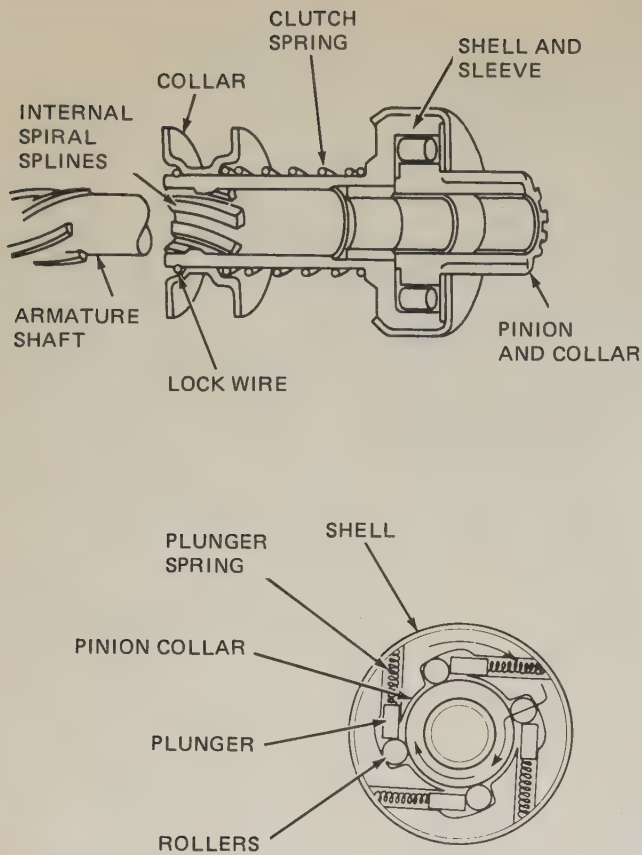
Cutaway and end sectional views of an over-running clutch. (Delco-Remy Division of General Motors Corporation)
